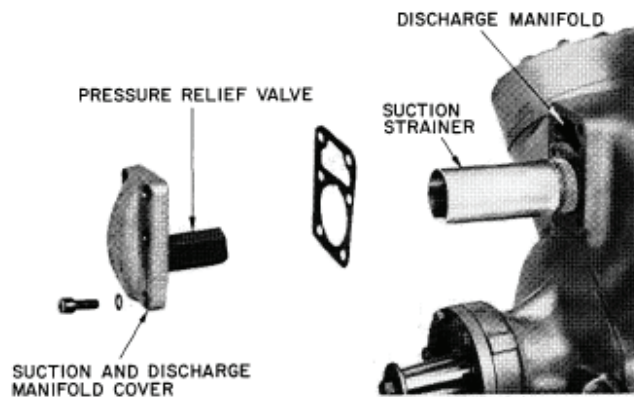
Pressure Relief Valve and Suction Strainer (5H40, 46, 80, and 86)
